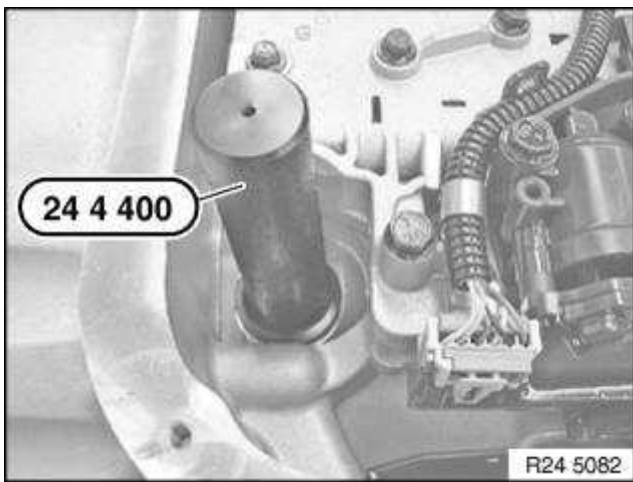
Drive Transmission Filter Gasket Into Housing With Special Tool 24 4 400
